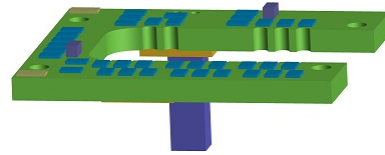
Finger PCB for strain gauges, heater and temperature sensor (in purple the temperature sensor, orange heater resistors)
